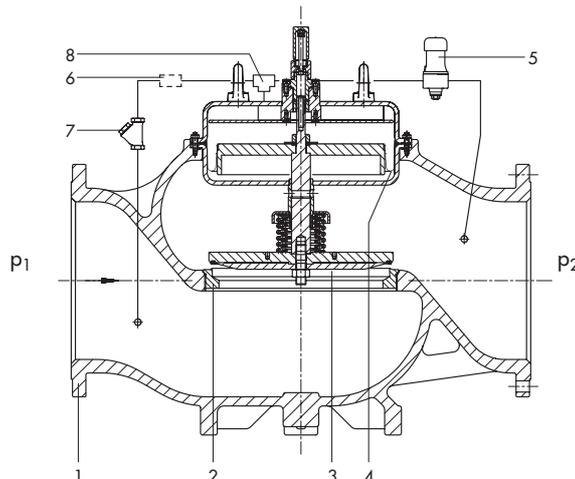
· Type 2333 Pressure Reducing Valve (DN 300 and DN 400), principle of operation
